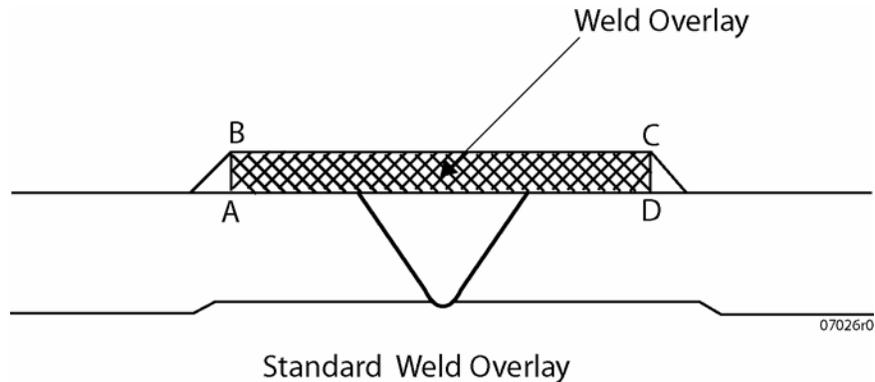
Schematic Cross-section of a Standard Weld Overlay
